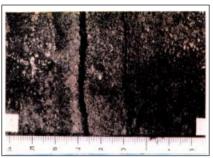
Grooving corrosion of welding of bottom plating
